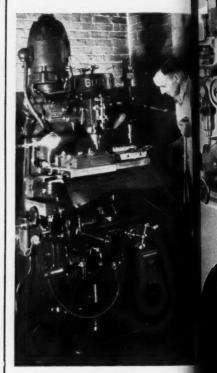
Vertical motor driving an engine machine. The drive from the motor spindle is by means of V-belts.
